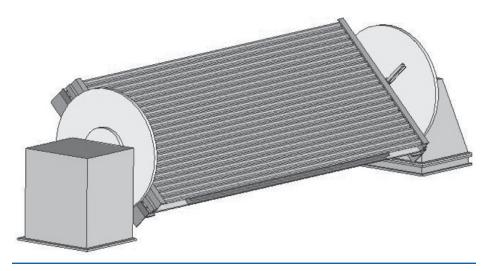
Computer rendering of the fixture design, showing rotation to weld the opposite side of the panel.
